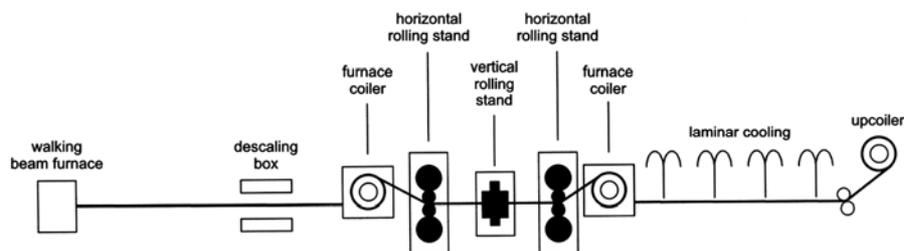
Layout of the two-stand reversible Steckel rolling mill P1500 [7]
